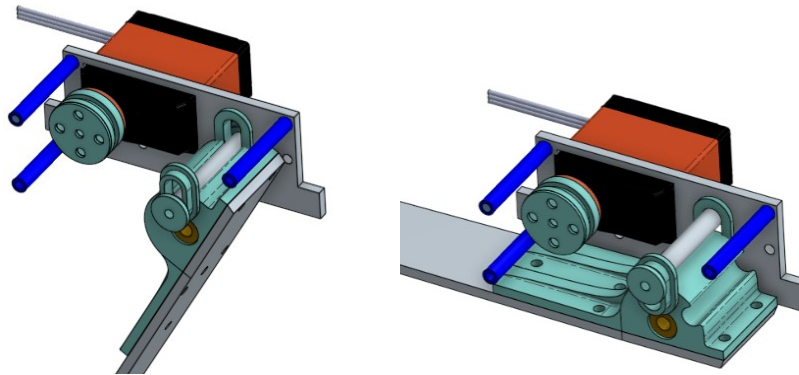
Retractable landing gear extended (left) and retracted (right)
